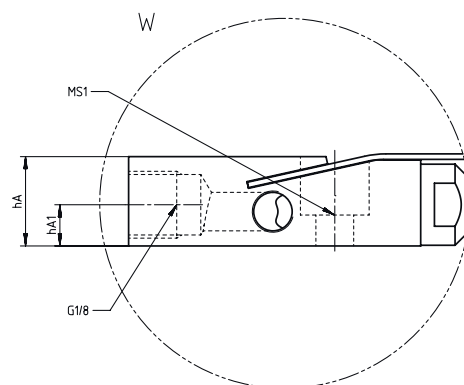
Secondary section end pieces to clamp the continuous cover strip
